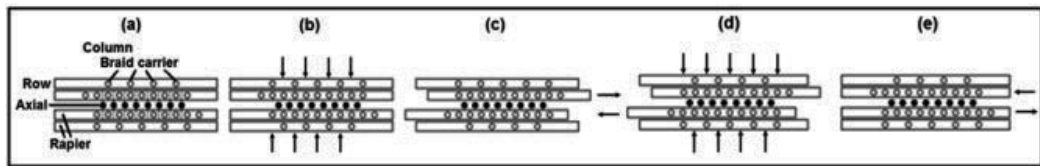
Three-dimensional axial braided preform fabrication principles (steps a-e) [75].
